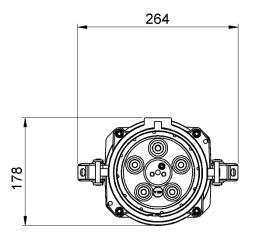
Dimensions Male Connector MC A-Line (500 A - 600 A) in mm
